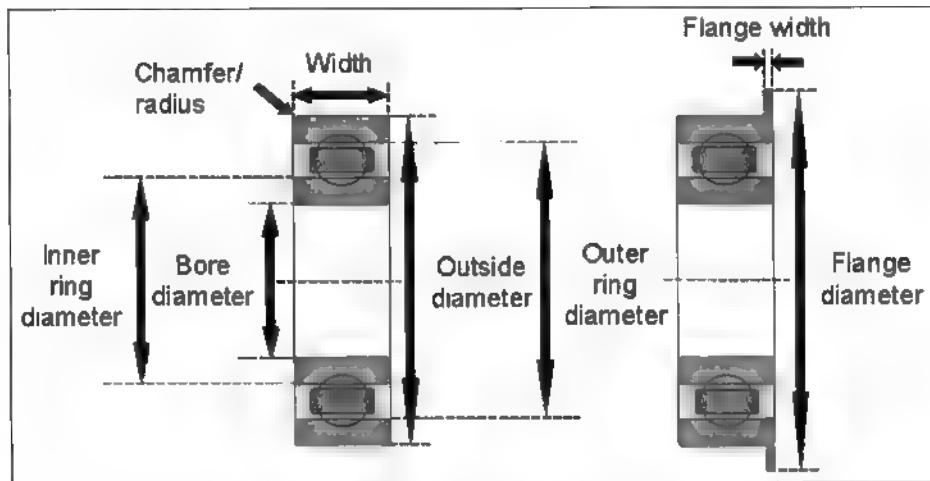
It is essential to have worked out the main dimensions of a bearing before making a new purchase.
